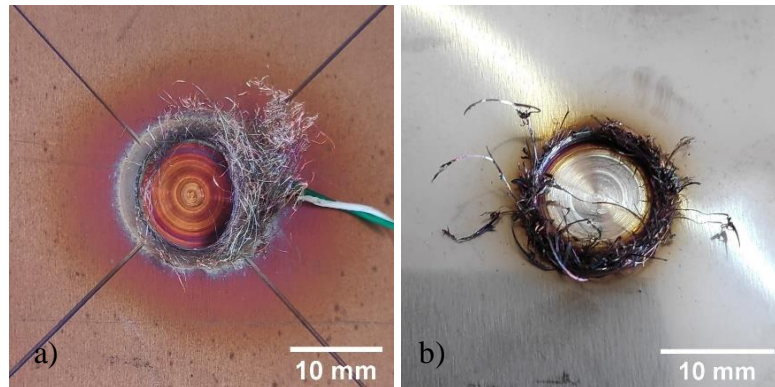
Burrs formation: a) SP12-Cu/SS-870-20-0.8 and b) SP10-SS/Cu-870-20-0.8.
